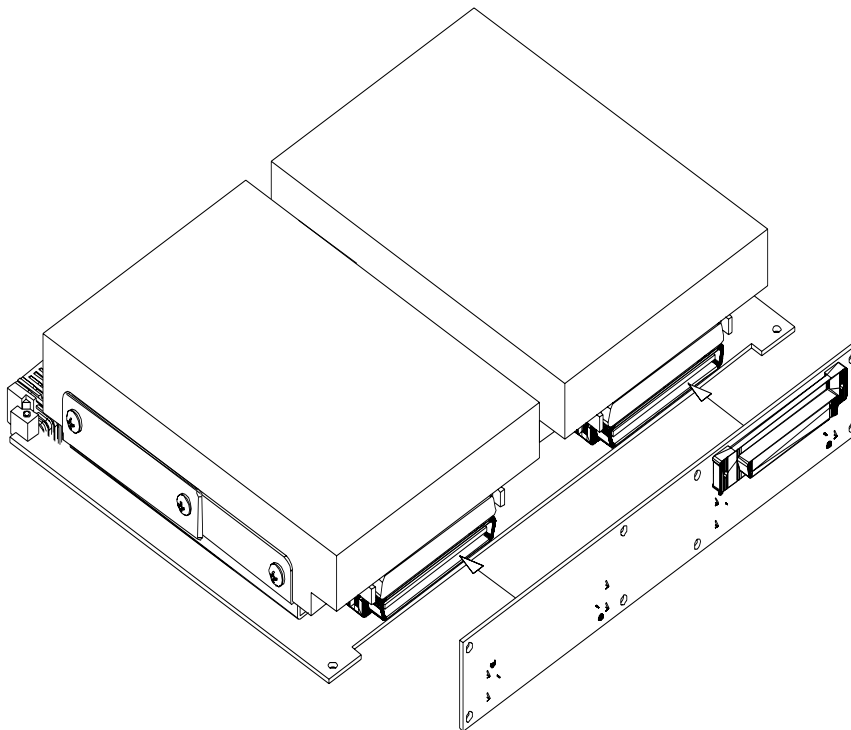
Mating the Daughter Card to the Carrier and Two Hard Drives
